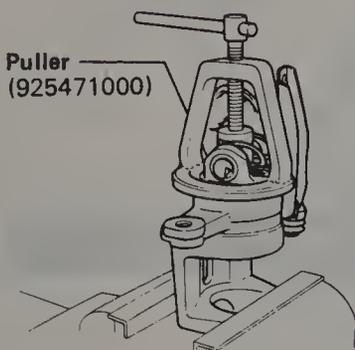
The special tool needed to remove the lever and spindle (Sec 7)
